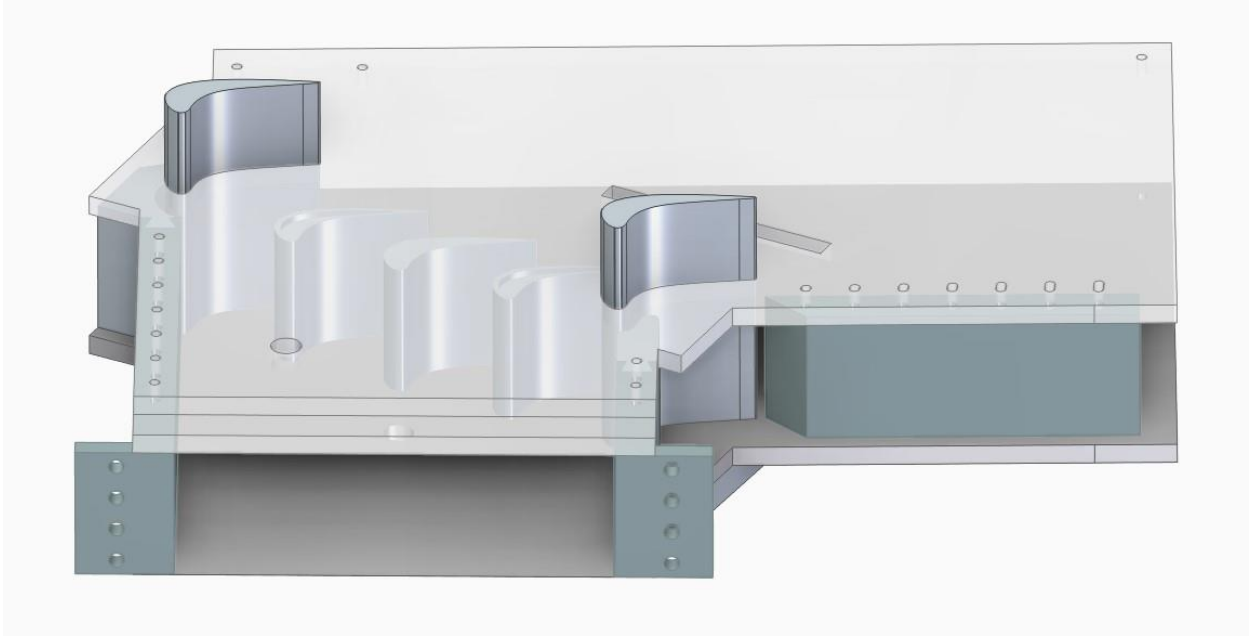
Three-dimensional isometric view of the linear cascade assembly.
